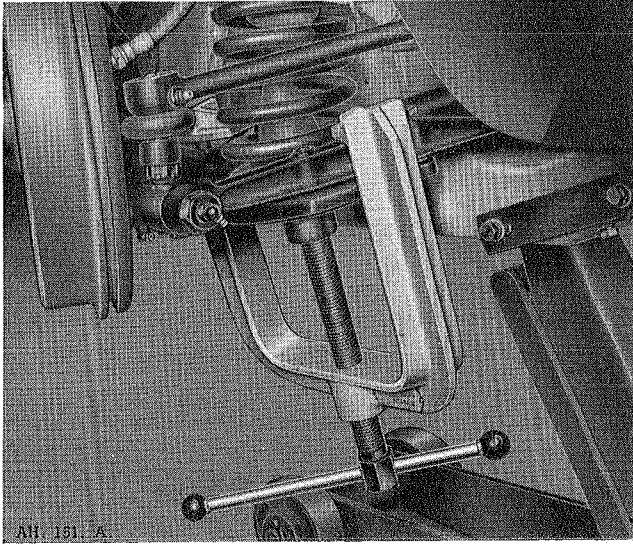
Illustrating the coil spring compressor (Service Tool 18G.37) in position.
